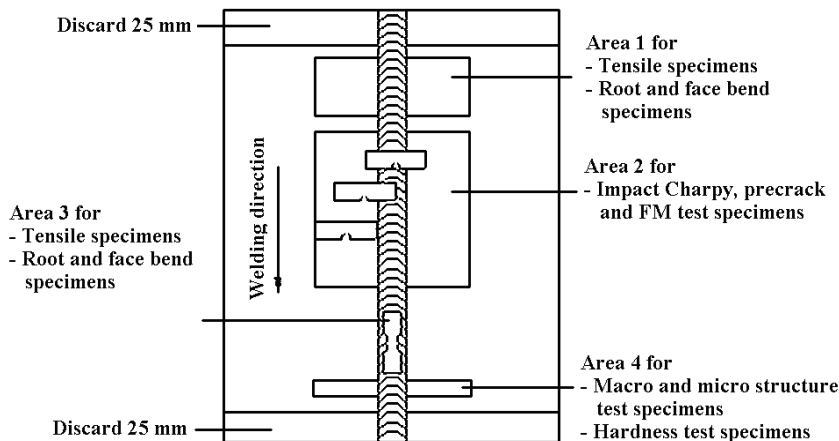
Welding direction and specimen positions in the sample plate
